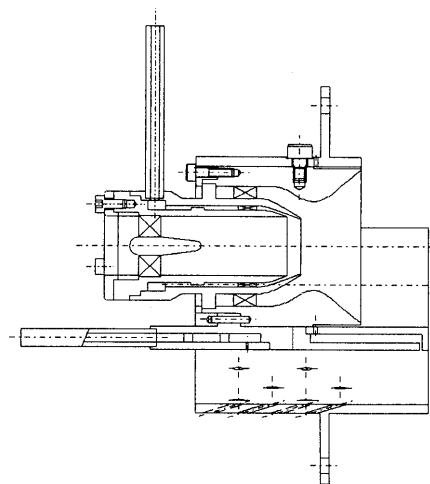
Cross Section of Fuel Nozzle B1 and B2
